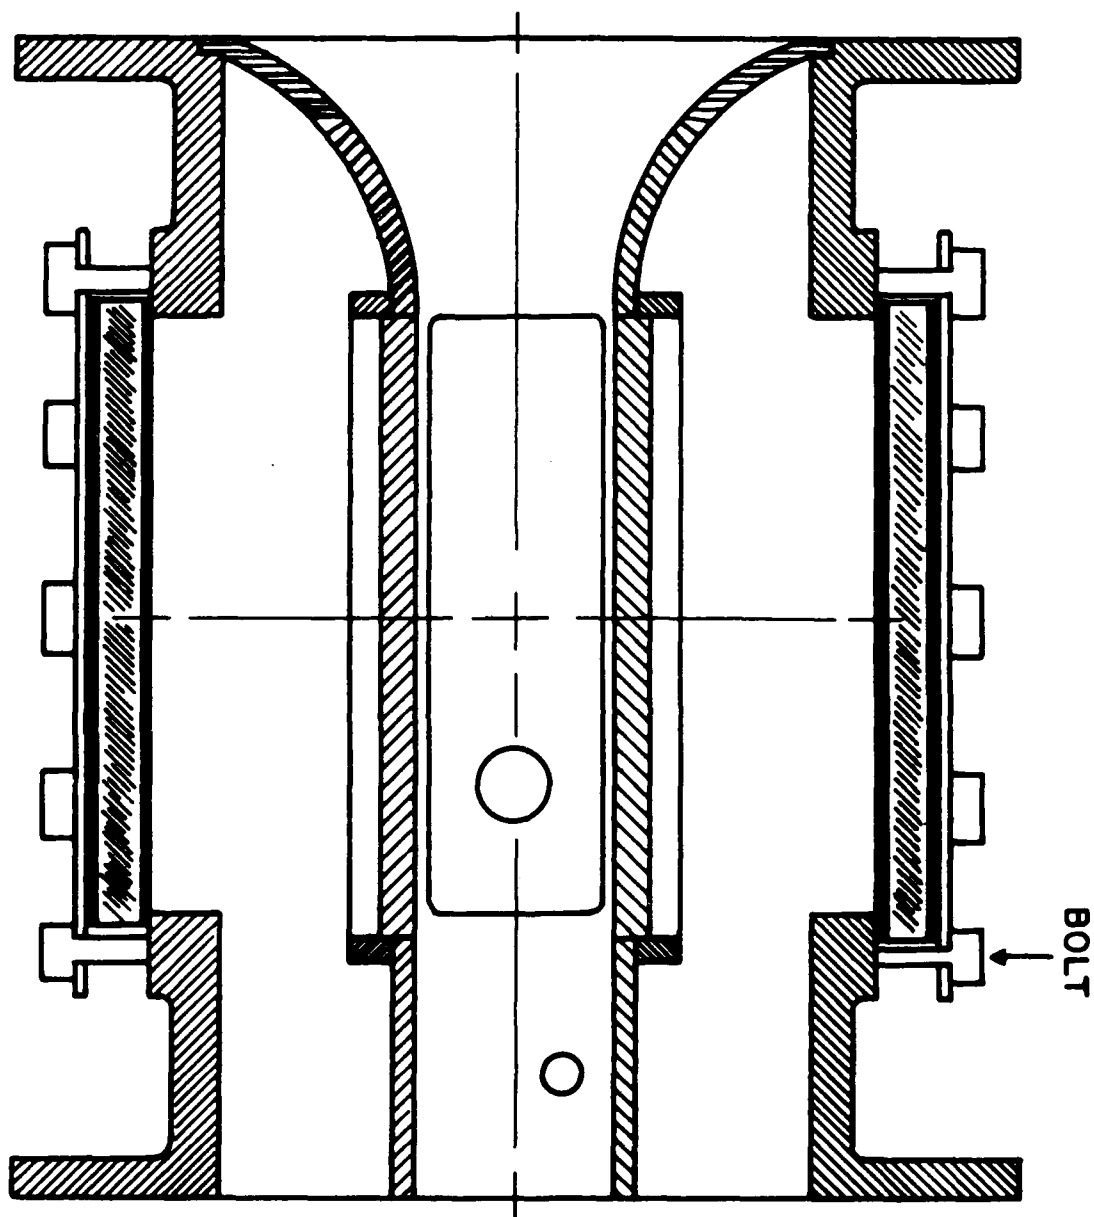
A Cross-sectional View of Test Section Showing Converging Nozzle Installation
